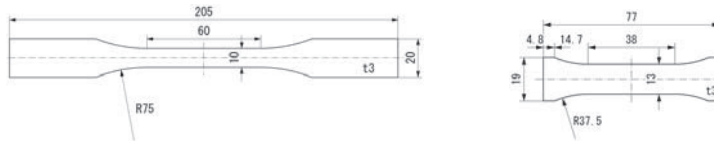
Specimen configuration (a) for resin tensile test; (b) for resin and resin with chips compressive tests; [mm]
